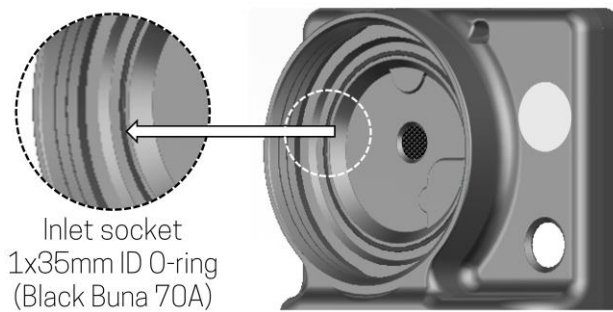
UPAS inlet socket O-ring, black, 35-mm ID × 1-mm CS, Buna 70A, common to all UPAS versions.
